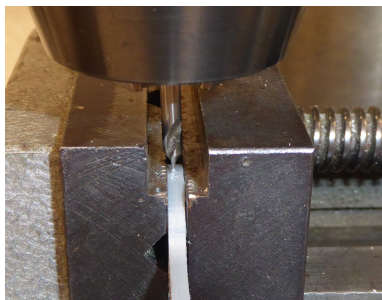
Clamp Outer Gimbal for beam centering drill D1x1 at +/- 180 Degree
